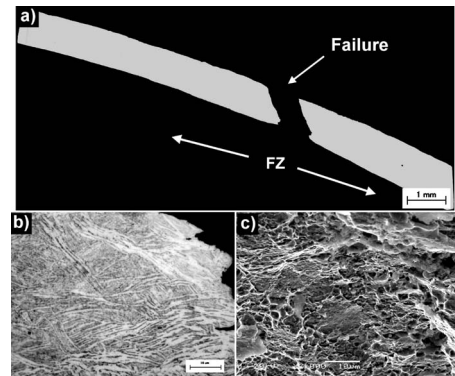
Representative images of the longitudinal plane strain forming specimen showing (a) cross section macrostructure at the location of failure, (b) microstructure beside the failure, and (c) fractured surface
